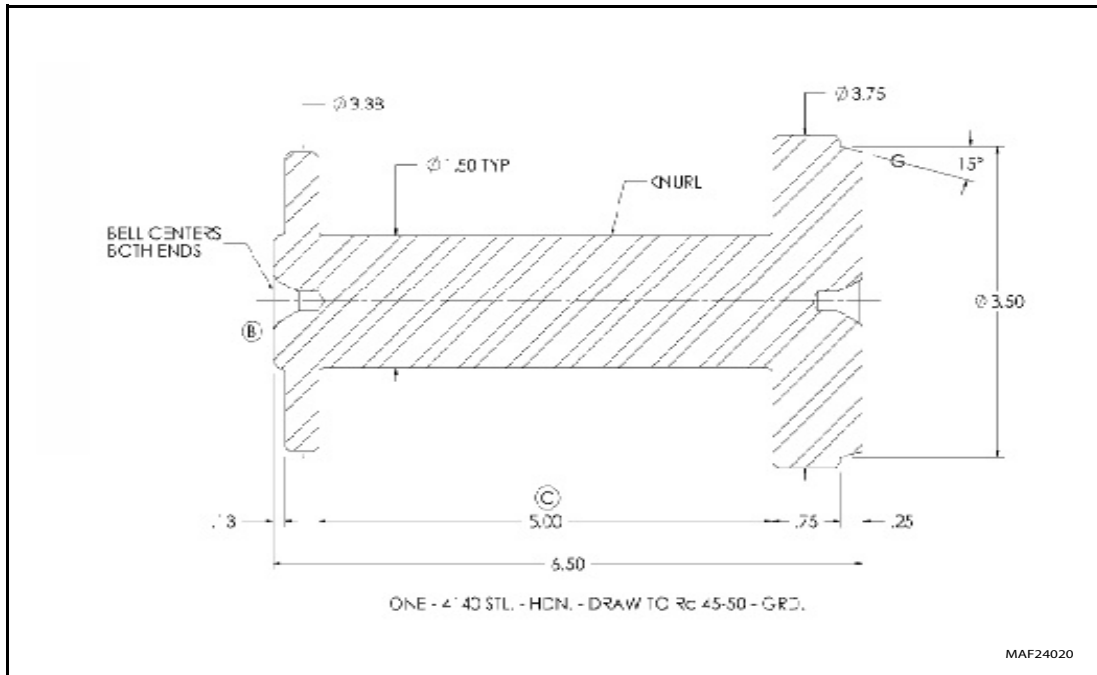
Bearing Cup Pressing Tool (T155291)
